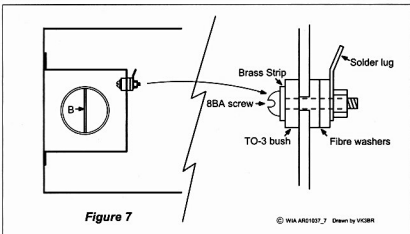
End view of centre conductor without SO239 and square box, including end view of strip line sampling conductor. Detail of TO3 bush and fibre washers holding strip and solder lug - DOUBLE SIZE.
